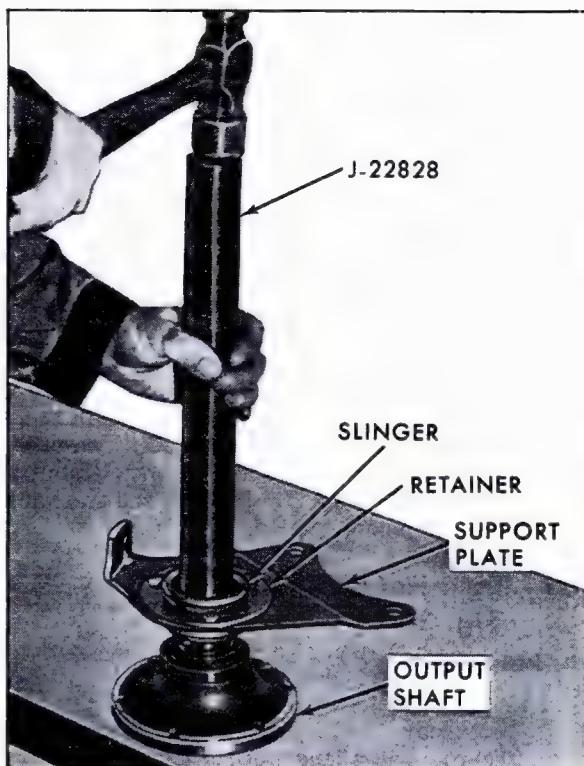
Installing Right Hand Output Shaft Support Slinger
